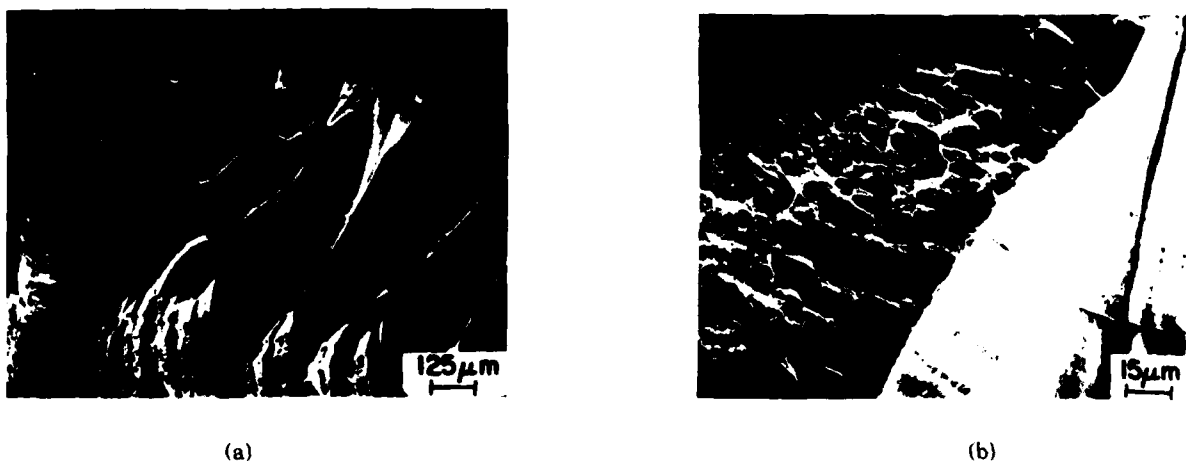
a) Ductile and shear zones of fracture in a shear localized chip obtained from a medium carbon low alloy steel machined at a cutting speed of 2000 m/min., and b) Voids around inclusions in the ductile rupture zone.
